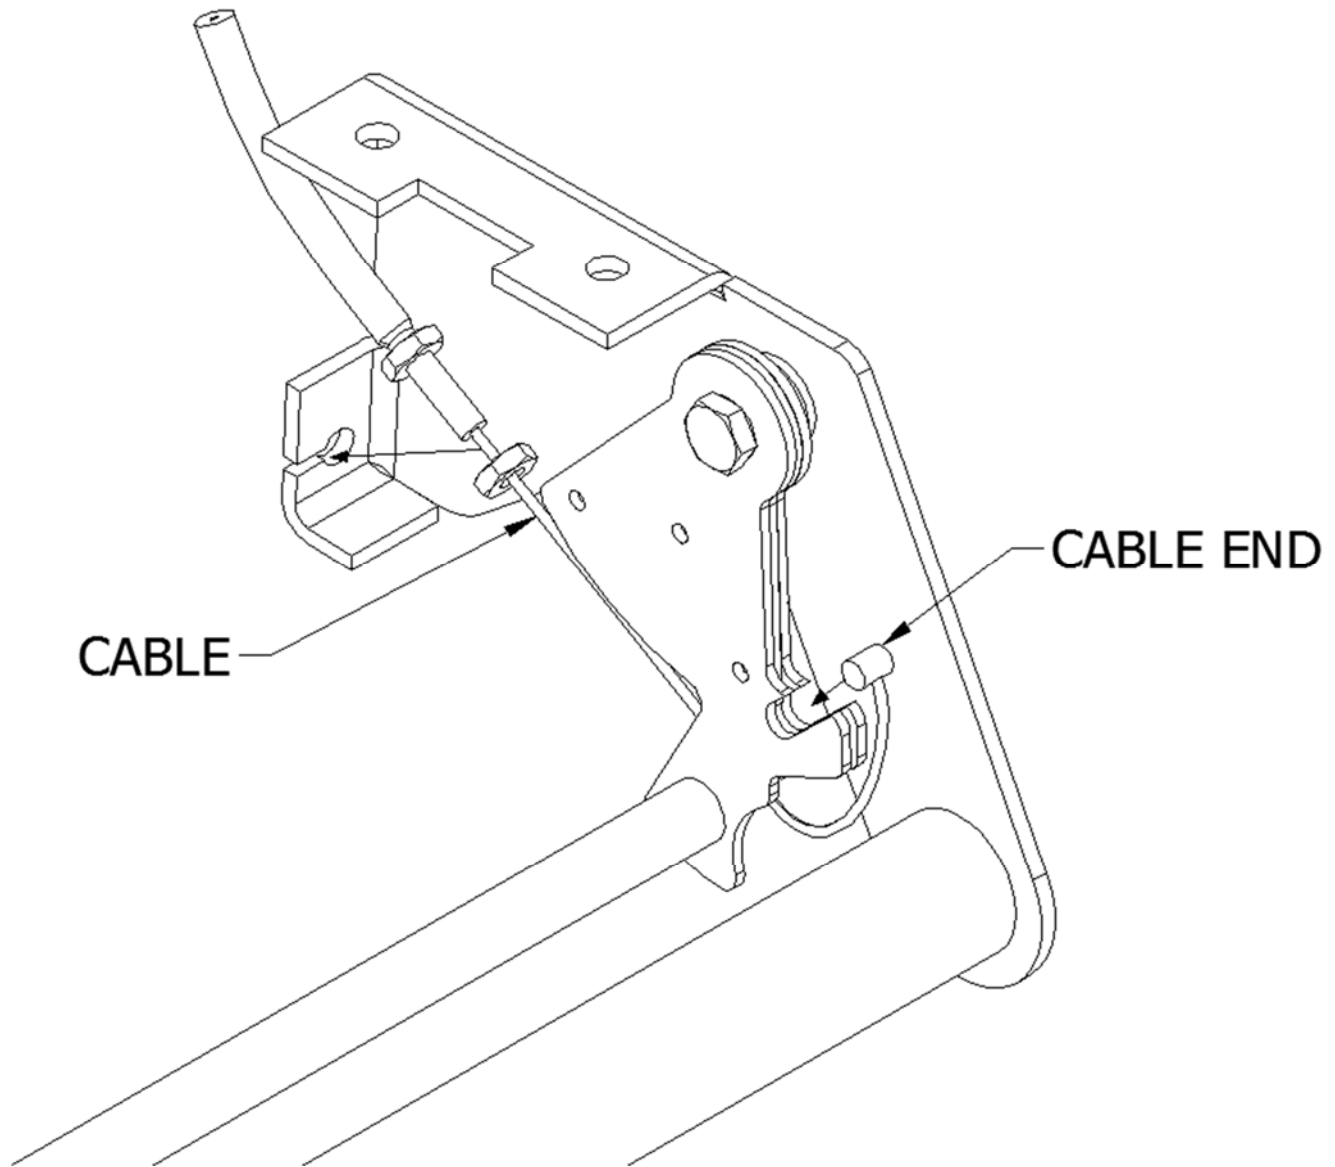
Insert cable end while guiding it between the two plates. Pull cable tight and guide through slot.
